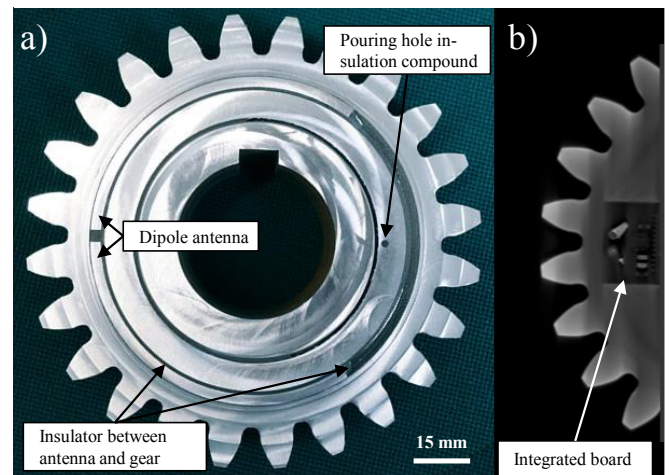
a) manufactured gear (diameter = 118 mm) with marked dipole antenna and present insulation, b) CT scan to verify the right positioning of the integrated PCB in the gear.
